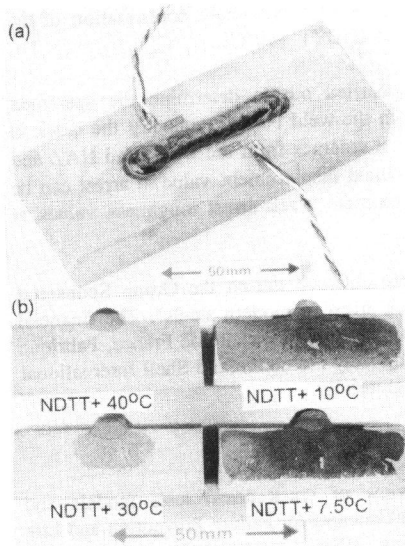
Drop-weight 'Pellini' specimen: (a) instrumentation (b) fracture face appearance of conventionally tested specimens
